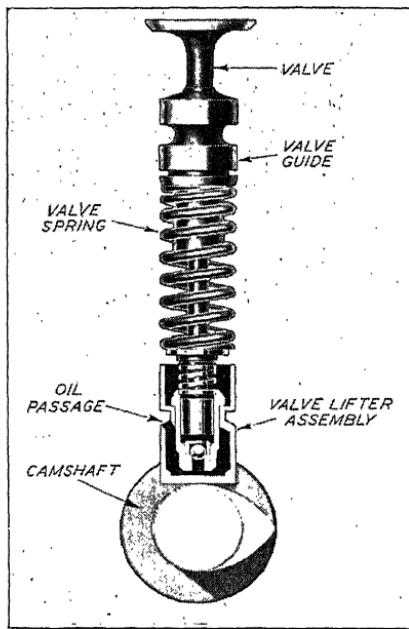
Lincoln-Zephyr Hydraulic Valve Lifter Assembly
